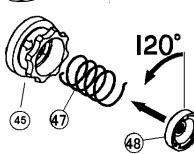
Brake Spring, Free Chain Knob & Female Thread Assembly
